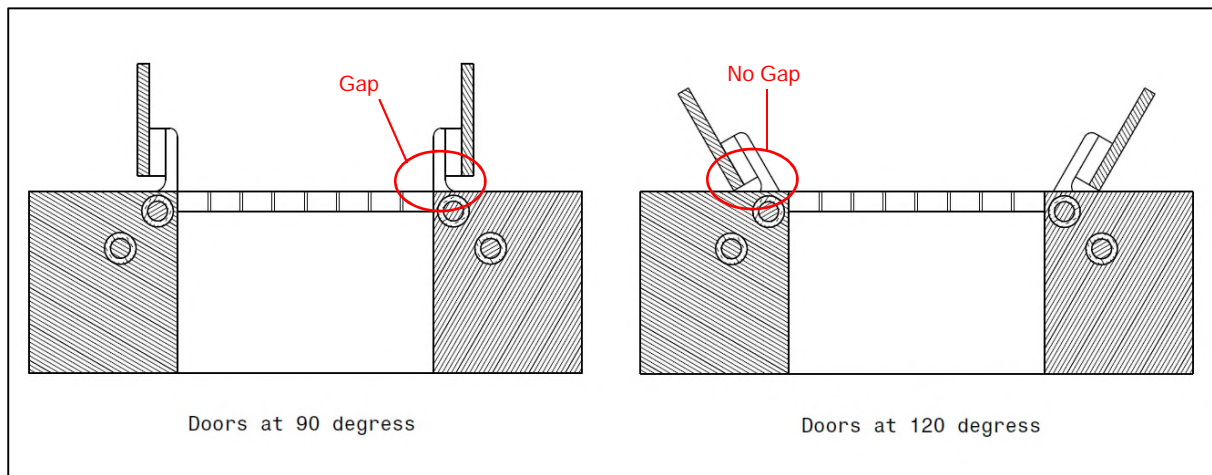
Cross section view of cavity with doors open at 90 and 120 degrees. *The section is a cut in the cavity YZ plane, looking downstream.
